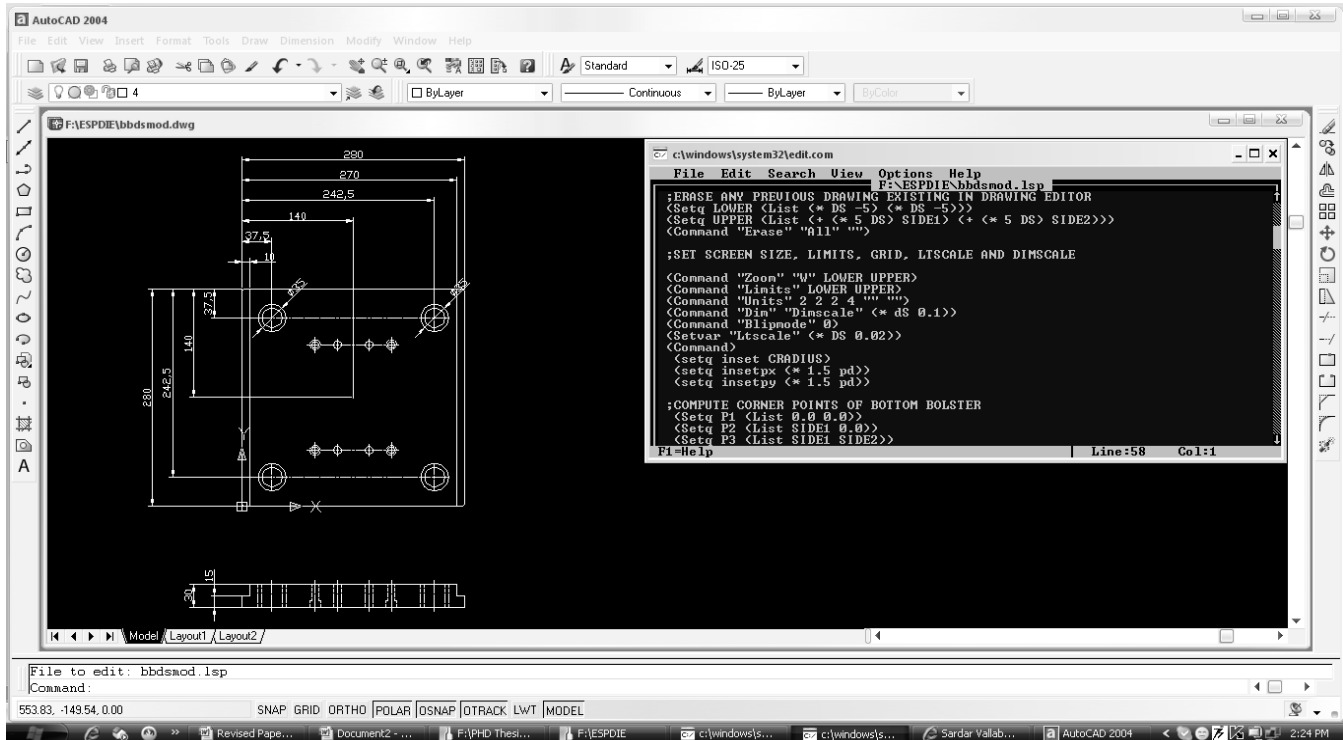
Sample run of system generating top and bottom views of bottom bolster of die-set in AutoCAD for example component
